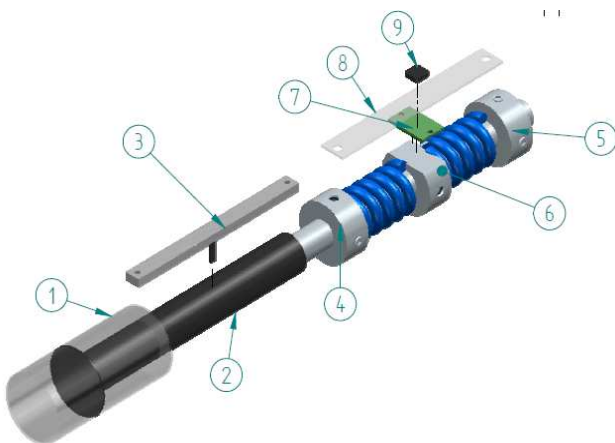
Sensors assembly: (1) hydraulic cylinder bore; (2) hydraulic cylinder rod ;(3) linear potentiometer; (4), (5) and (6) guides; (7) circuit board; (8) optical sensor tape; (9) optical sensor.
